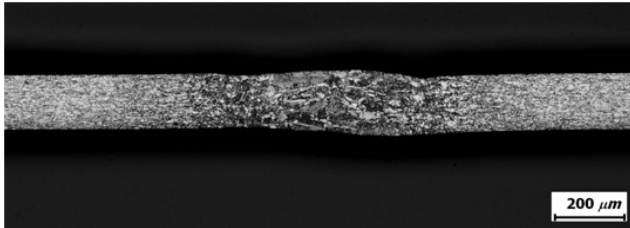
Cross section of the ultra-thin steel plate in a laser line welder
